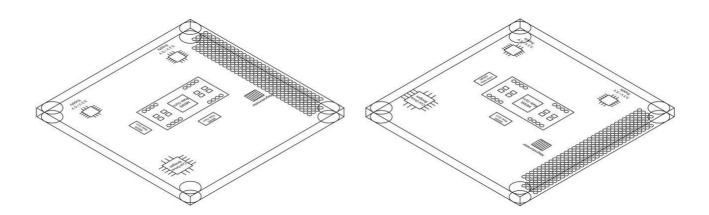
41 PRINTED CIRCUIT BOARD (PCB)-2
